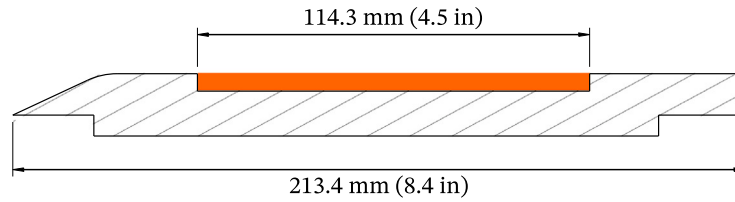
Side view of the fuel holder with the fuel represented as the orange rectangle. The width of the assembly is 50.8 mm (2 in), the same as the combustion chamber.
